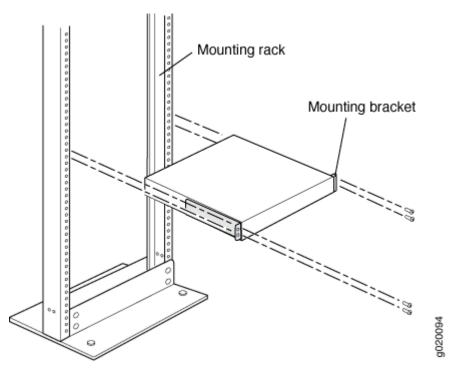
Mounting Bracket Attached to the Side Panel of EX4300-48MP and EX4300-48MP-S Switches
